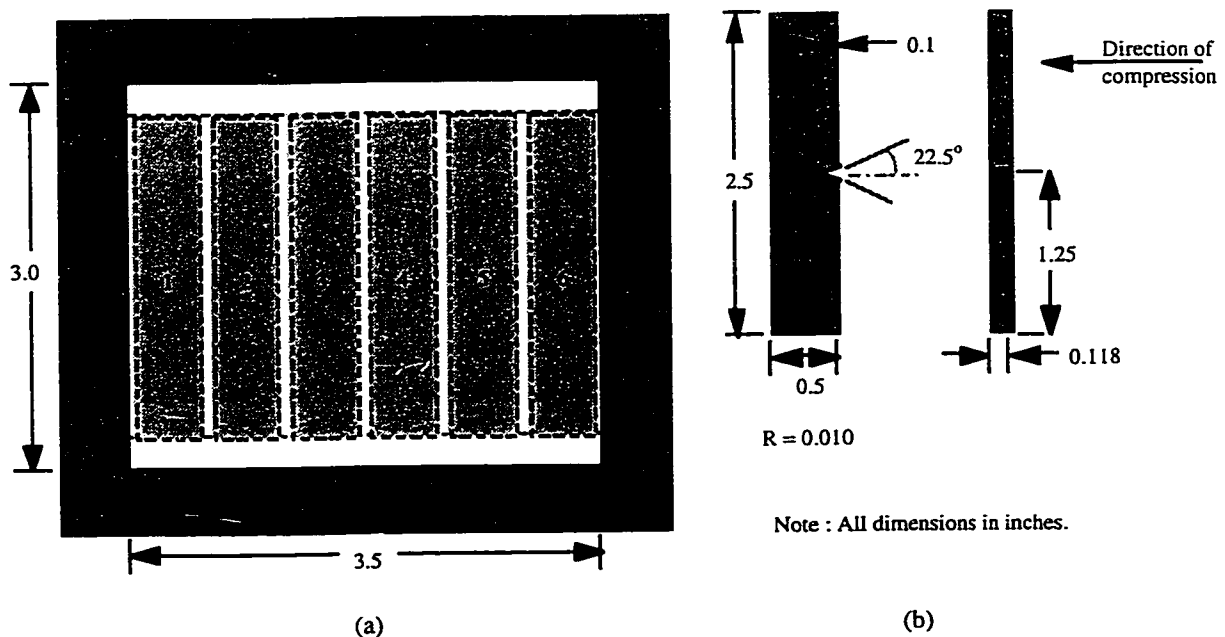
(a) Mold for Izod specimen preparation. (b) Dimensions of Izod specimen.
